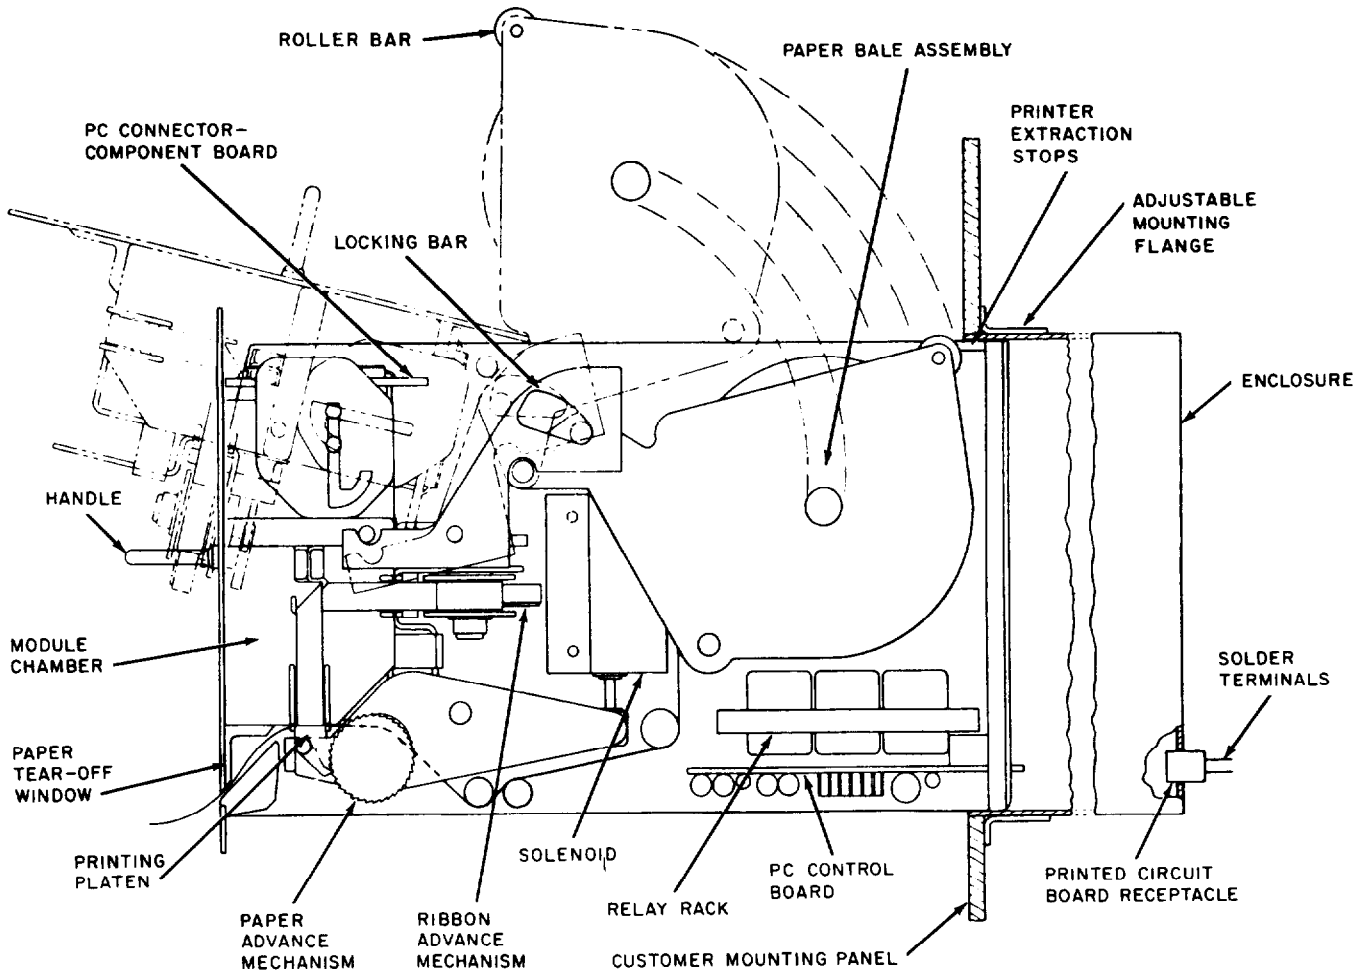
Component Parts—KS-20537, L1 Moduprinter
